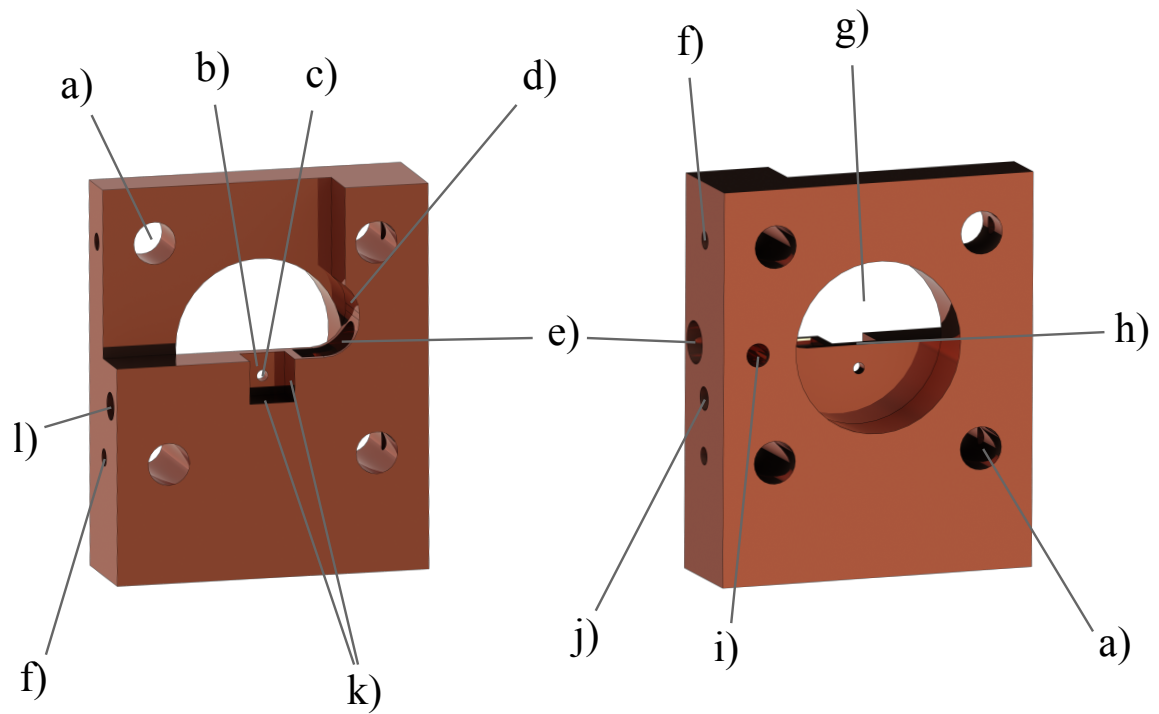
Front and back side of the copper housing of the TA chip. a) clearance holes for cage rods, b) slot to place the TA chip, c) M2 threaded hole, d) recess, e) guiding tunnel for cathode connection pin, f) M3 threaded holes for set screws, g) opening for translation mount, h) back wall of slot for TA chip, i) M4 threaded hole for set screw, j) M4 threaded hole to connect with anode cable, k) planes that define the TA chip's position, l) hole to place thermistor.
